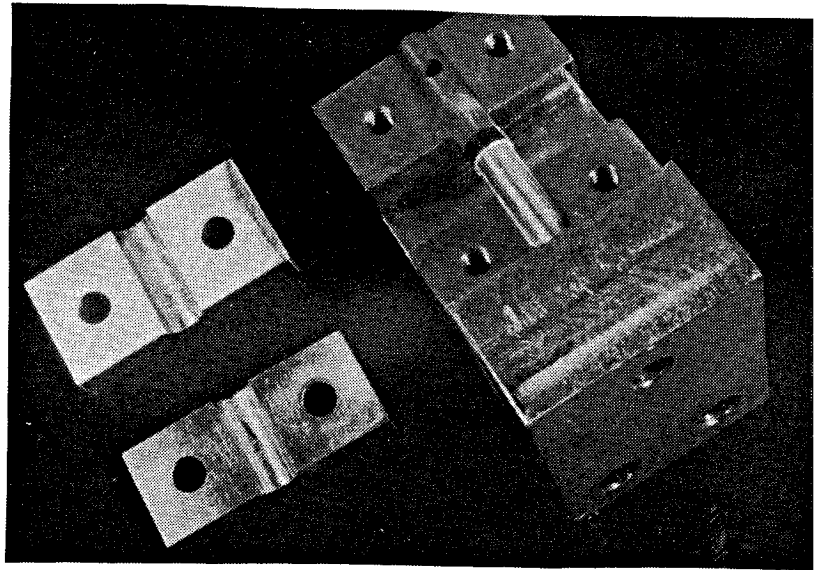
Pull Test Bonding Fixture Prepared for Bonding.
